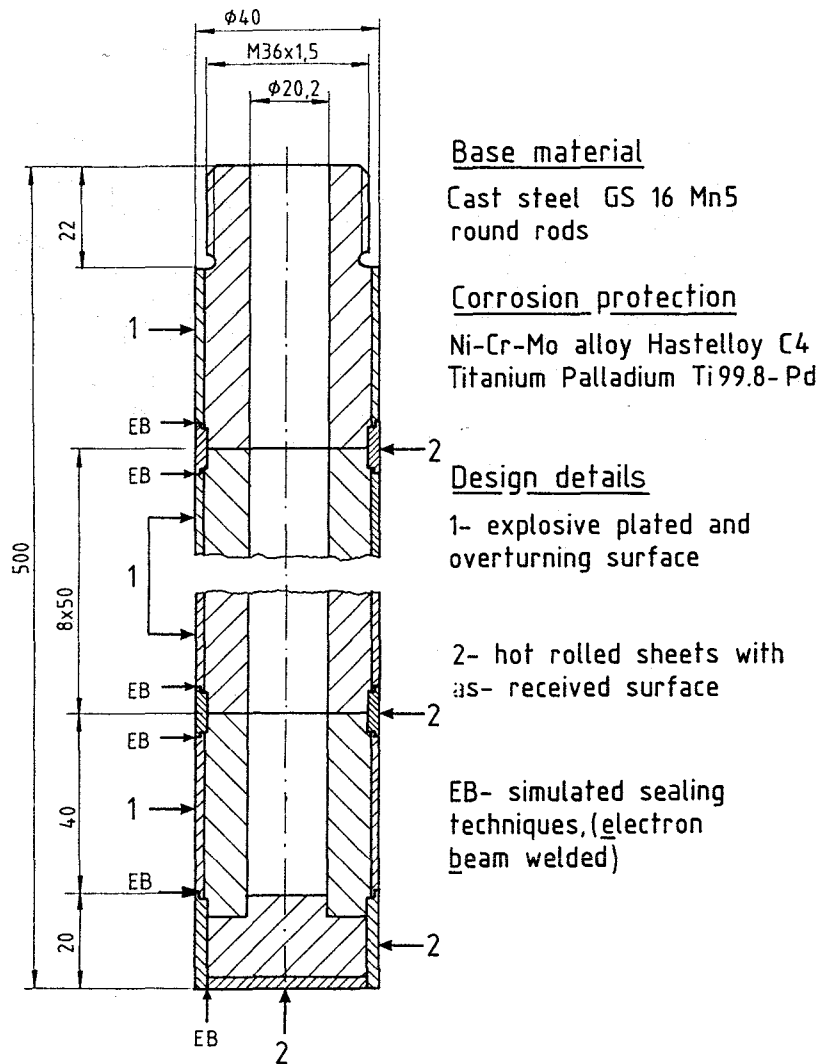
Materials, dimensions, and manufacturing details of tubes investigated
